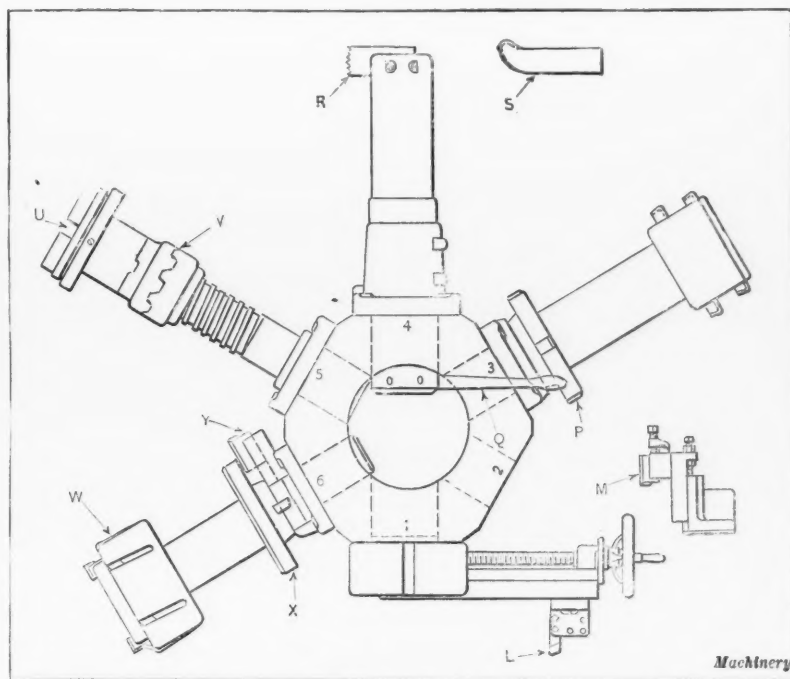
Diagrammatic Illustration of the Tooling Equipment provided for finishing the Valve shown in Fig. 5
